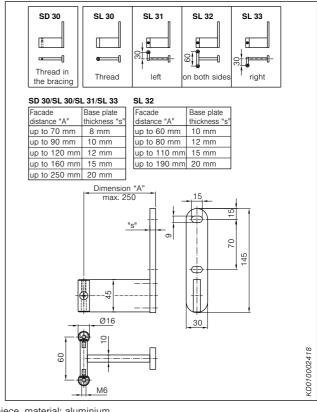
Tension cable bracket for cable bracing with M6 thread end piece, material: aluminium
